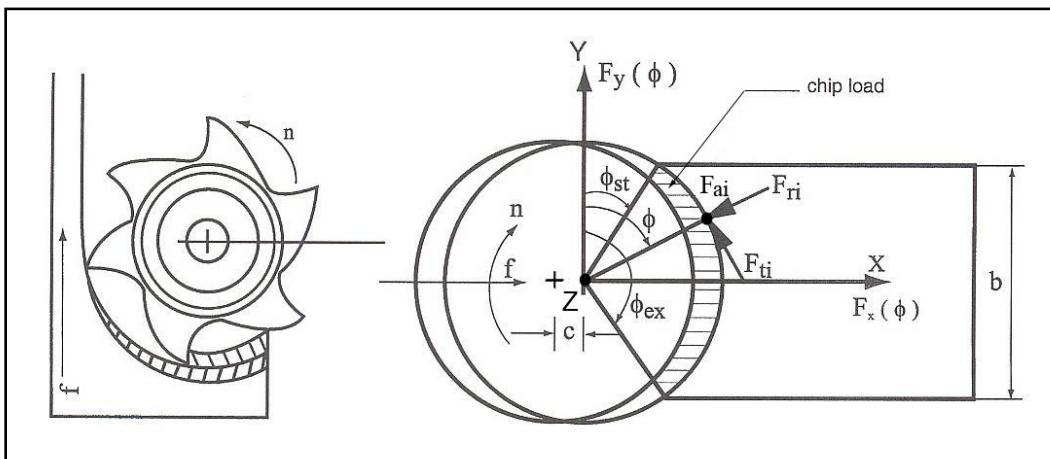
Schematic of a milling tool engaged in cutting (left) with labelling of important geometrical parameters (right) [33].
